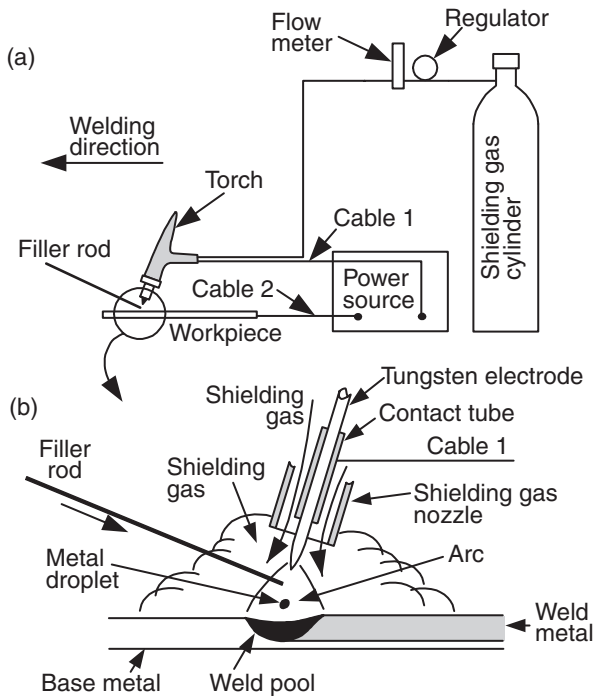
Gas-tungsten arc welding: (a) overall process; (b) welding area enlarged.
